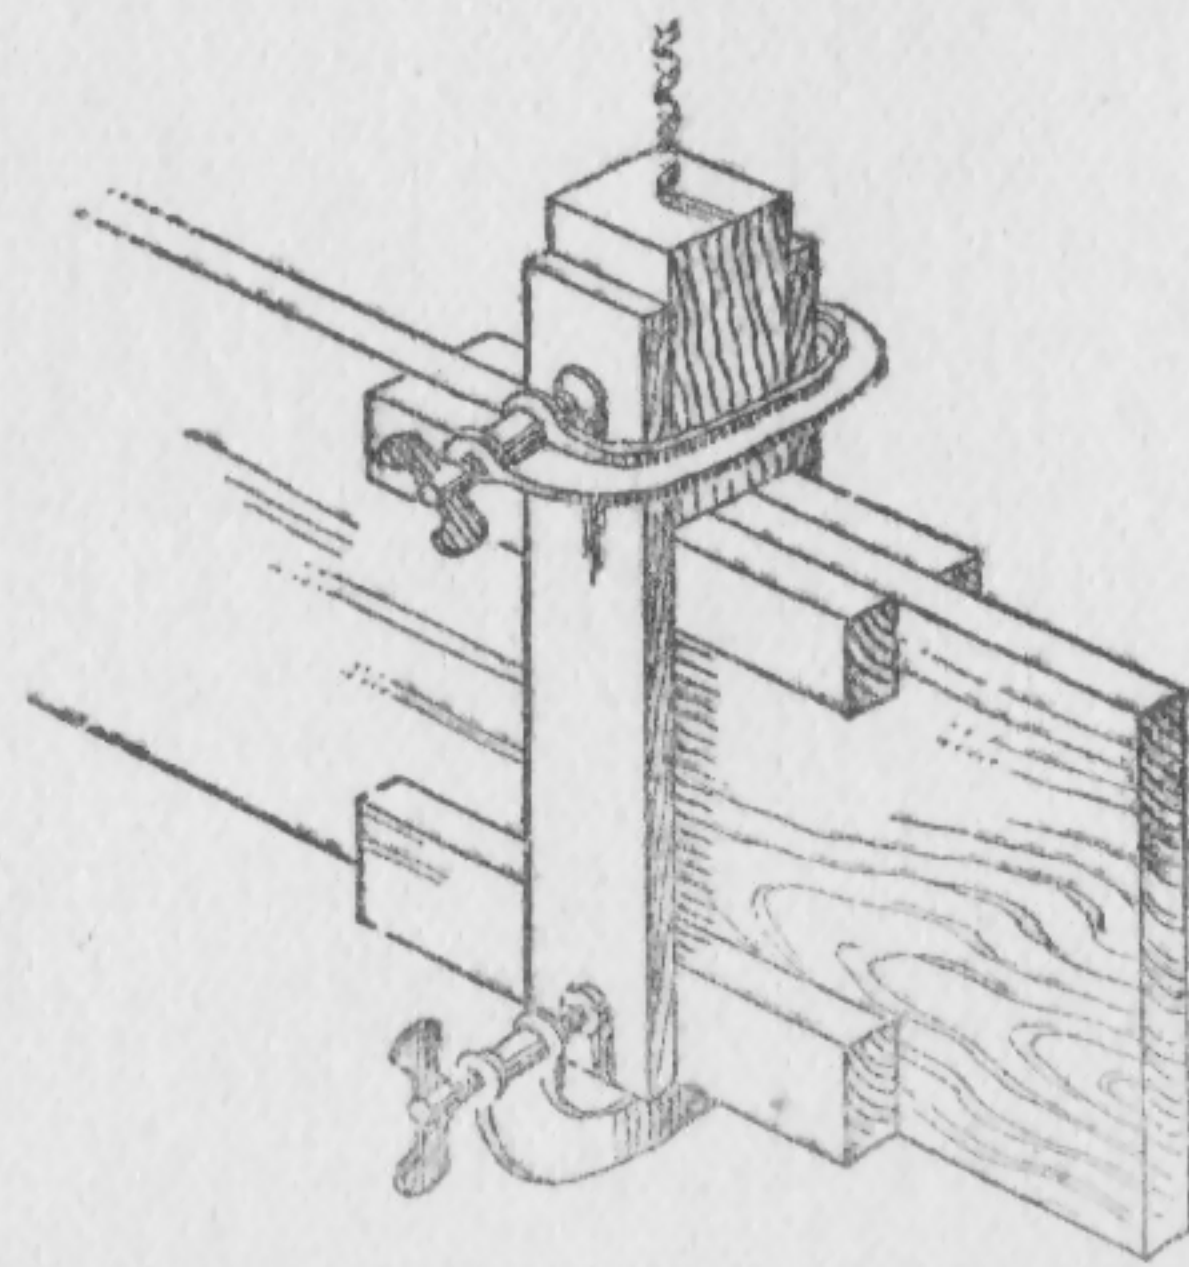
Boring through a board edgewise by using as guide a trued block, held by clamps.
